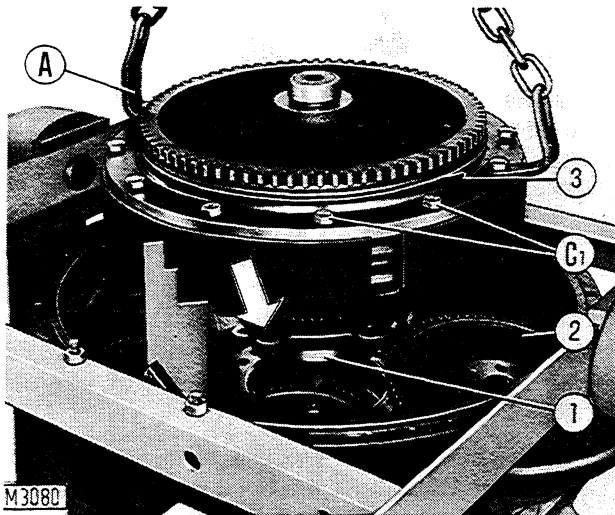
Disassembling or assembling clutch assembly using lifting chains 75291517 (A).
